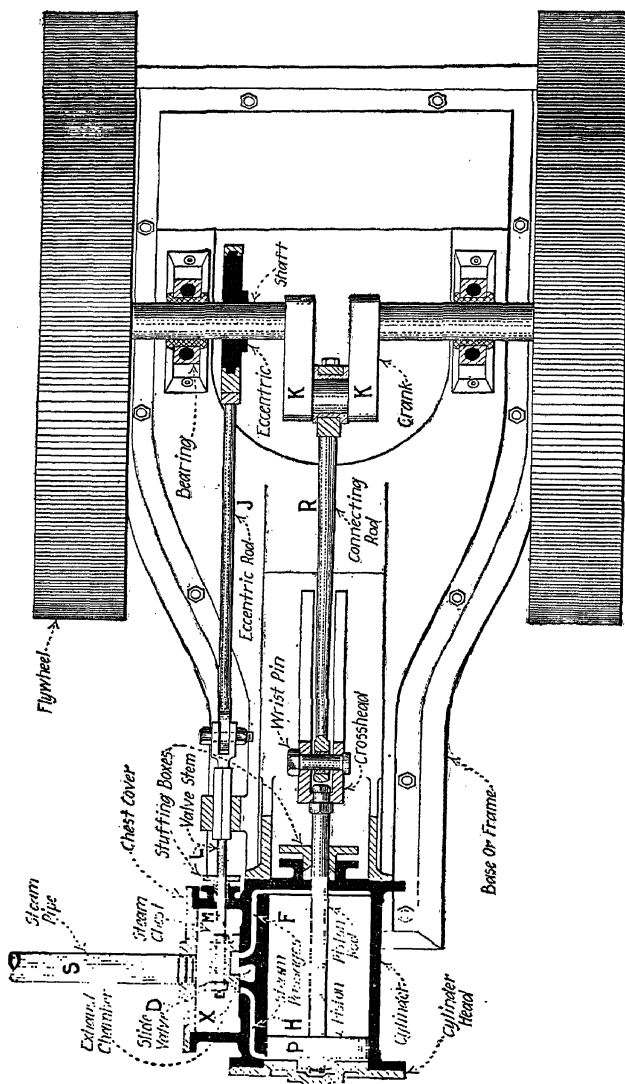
Sectional view of a simple D-slide-valve steam engine.
